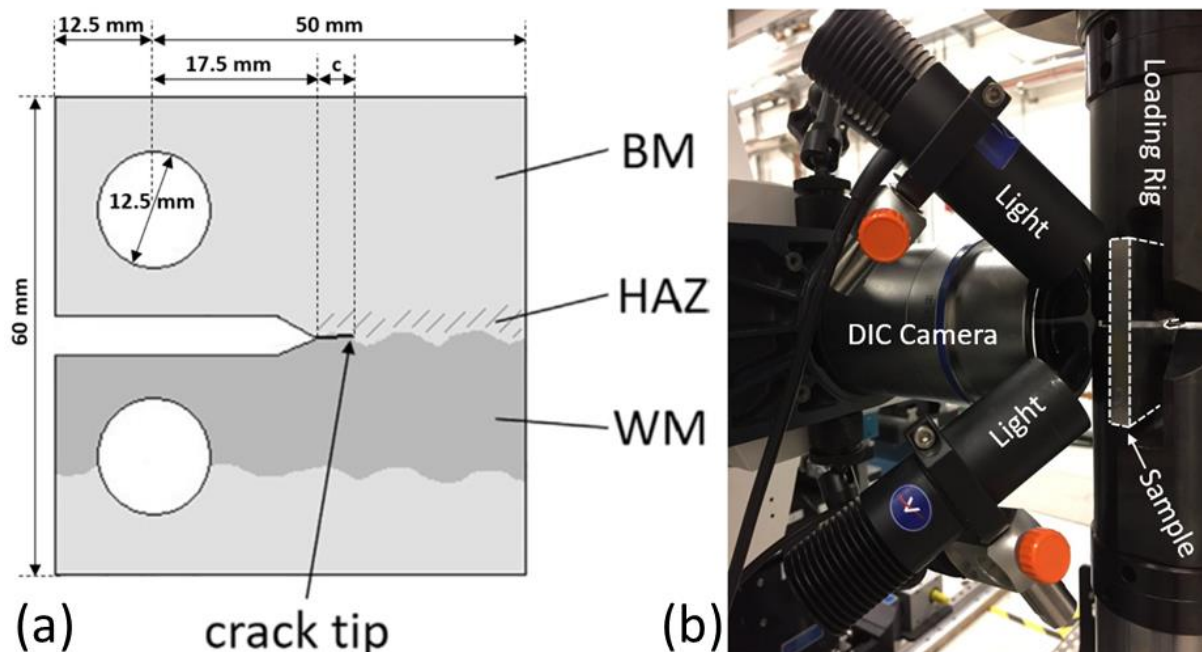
(a) Schematic of the compact tension (CT) specimen, identifying the weld metal (WM), heat affected zone (HAZ), base metal (BM) and the fatigue pre-crack location in the HAZ (adapted from [93]). (b) Experimental setup during DIC imaging acquisition.
